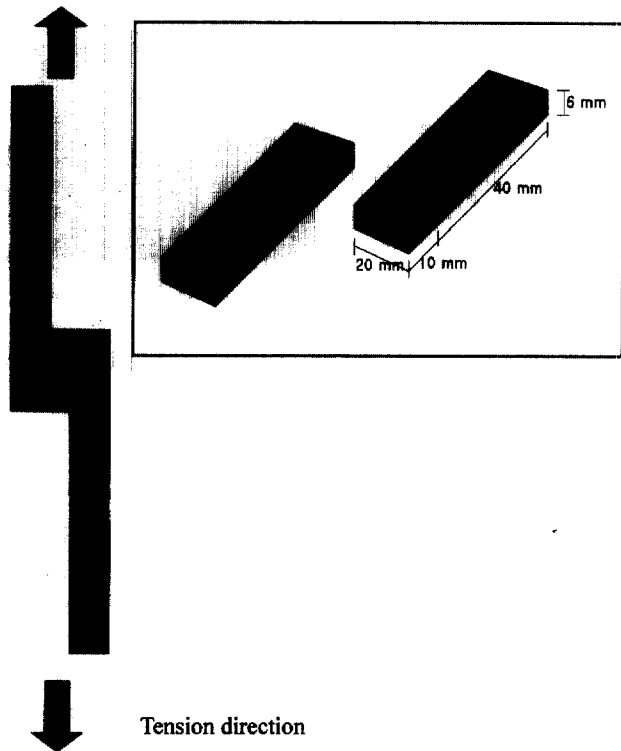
Schematic diagram of the shear test specimen with reflowed solder joint.
